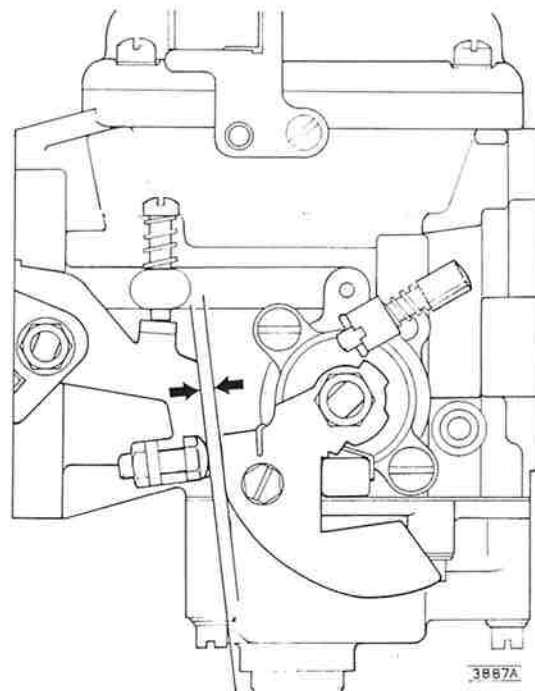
Fast idle adjustment. Gap between screw and cam should be .067".
